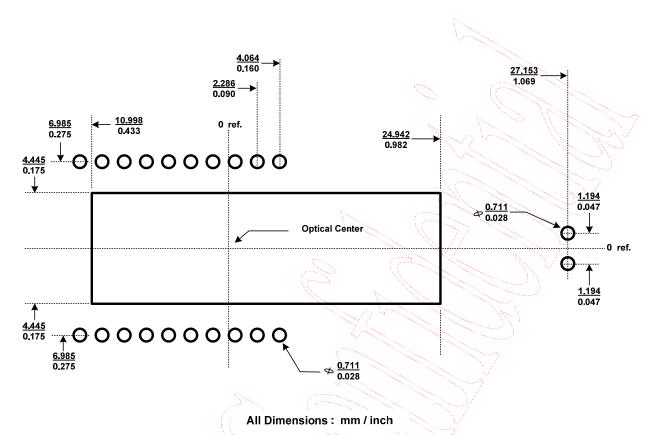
Recommended PCB Mechanical Cutouts and Spacing
